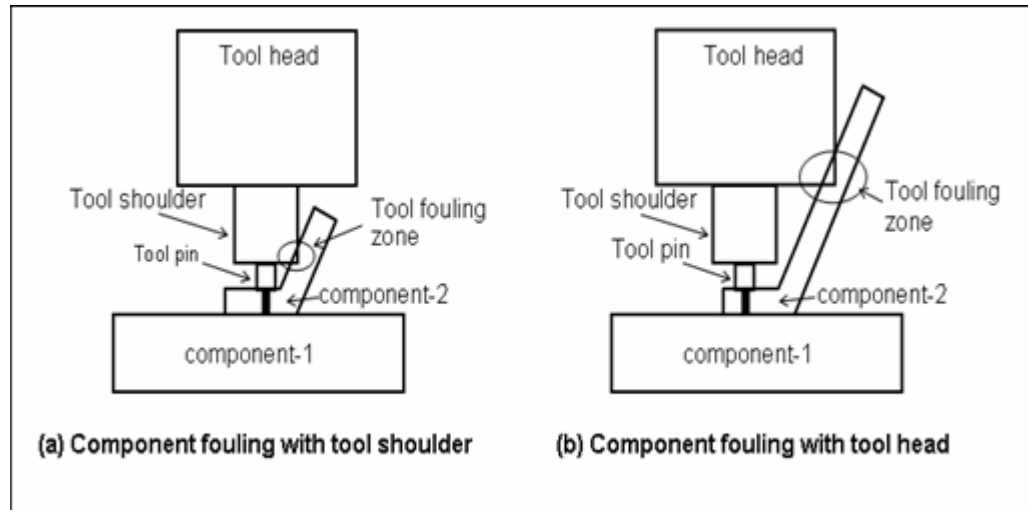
Interference of Tool Shoulder and Tool Head With the Component
